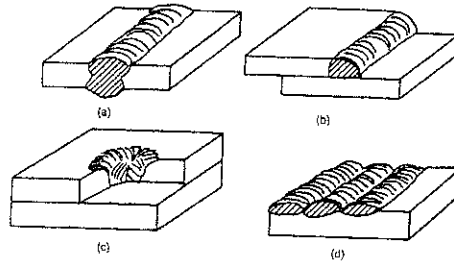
Fundamental types of welds, including (a) butt, (b) fillet, (c) plug, and (d) Surfacing (4)
